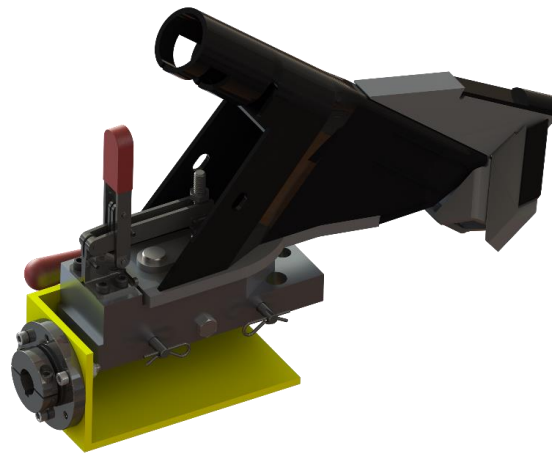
CCETE0 seeding opening secured to the clamping mechanism.
